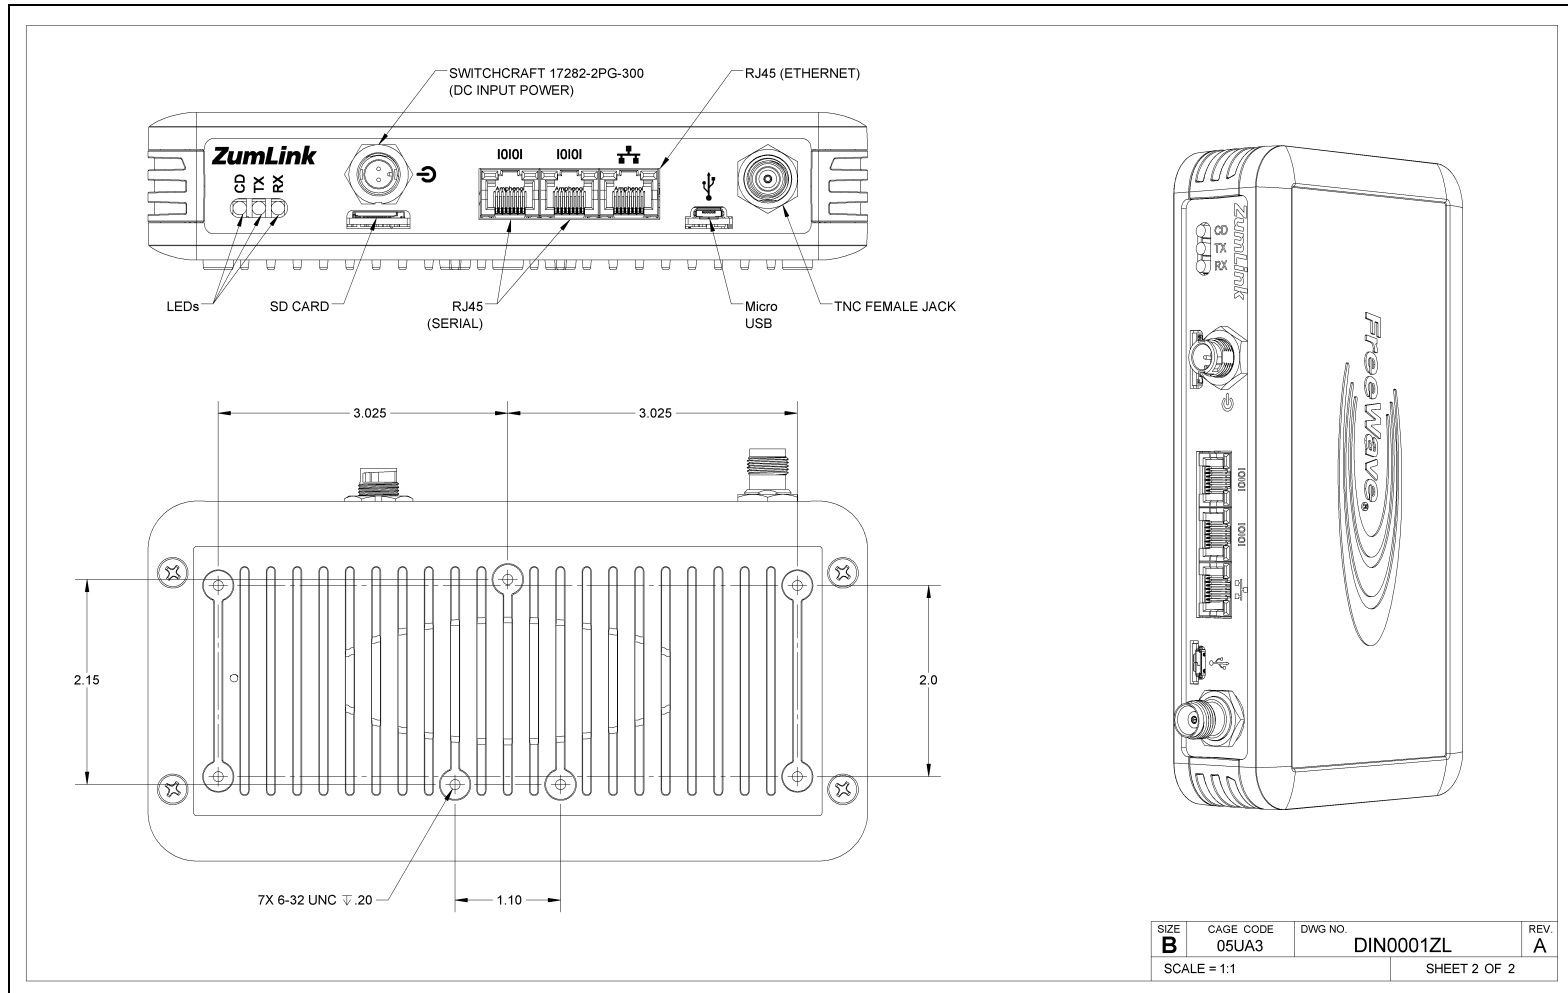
Z9-PE Mechanical Drawing - Back and Sides
